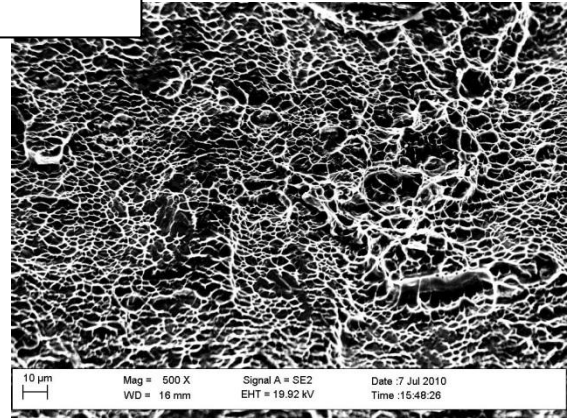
Fracture surface of the vertical specimen after tensile testing
